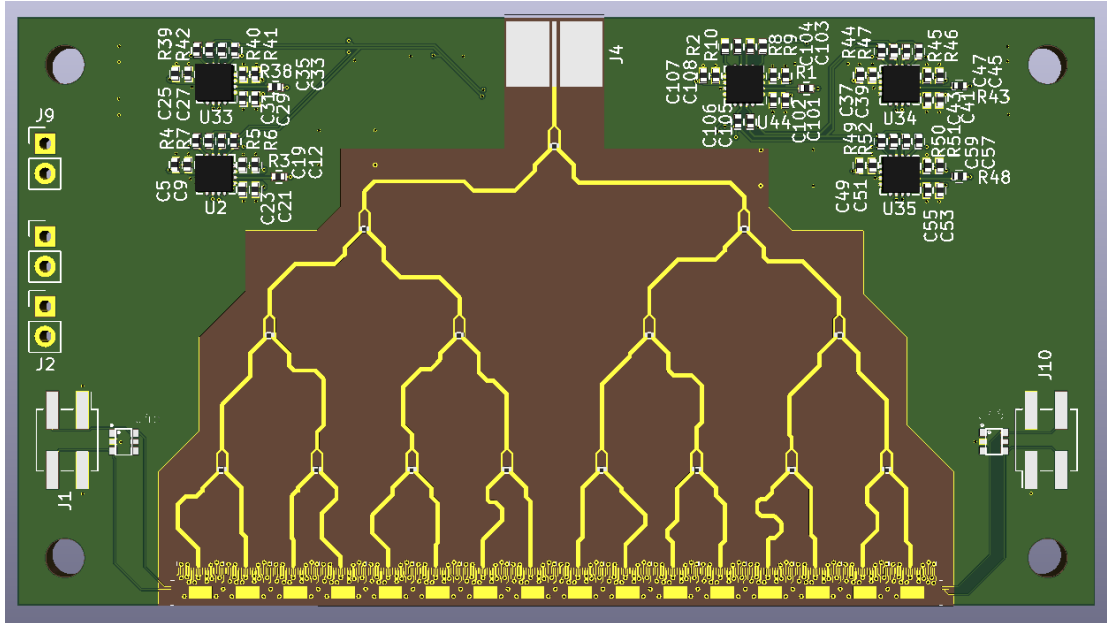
CAD drawing of 16-chip phased array PCB.
